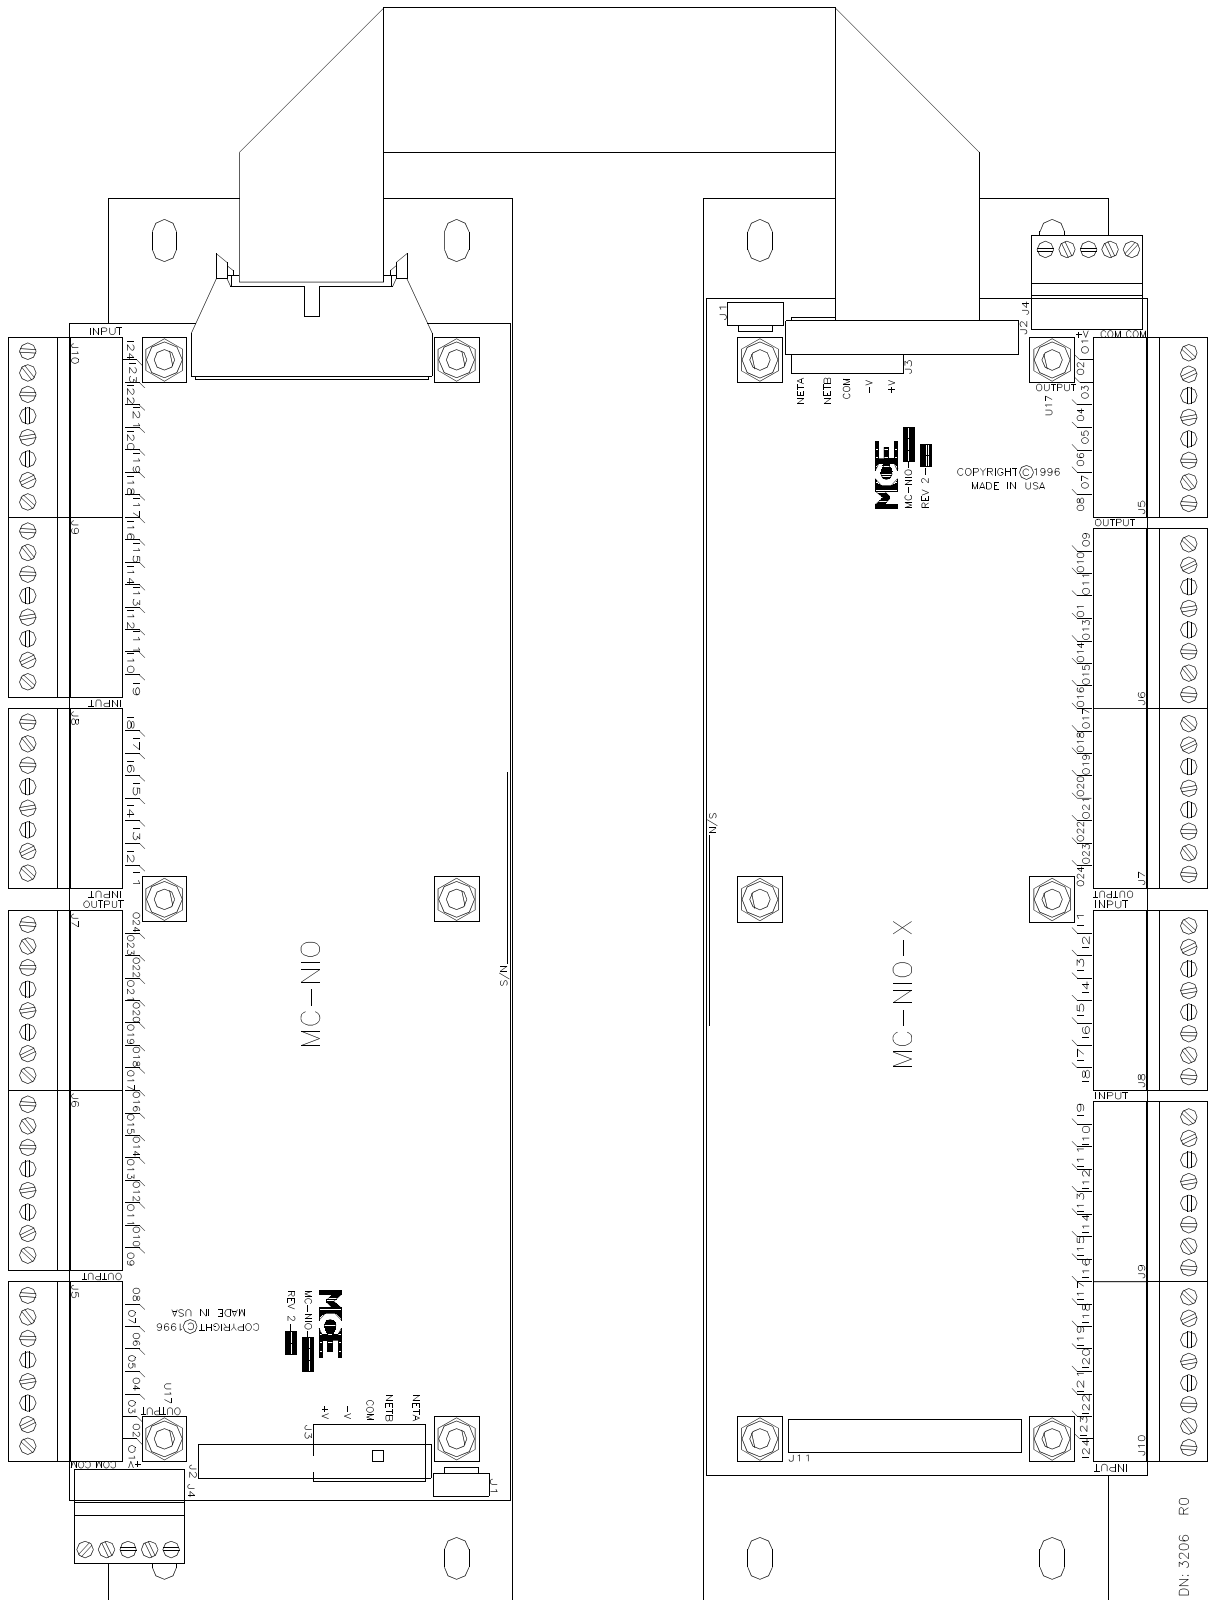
Mounting Option 3: Boards Placed Side By Side
